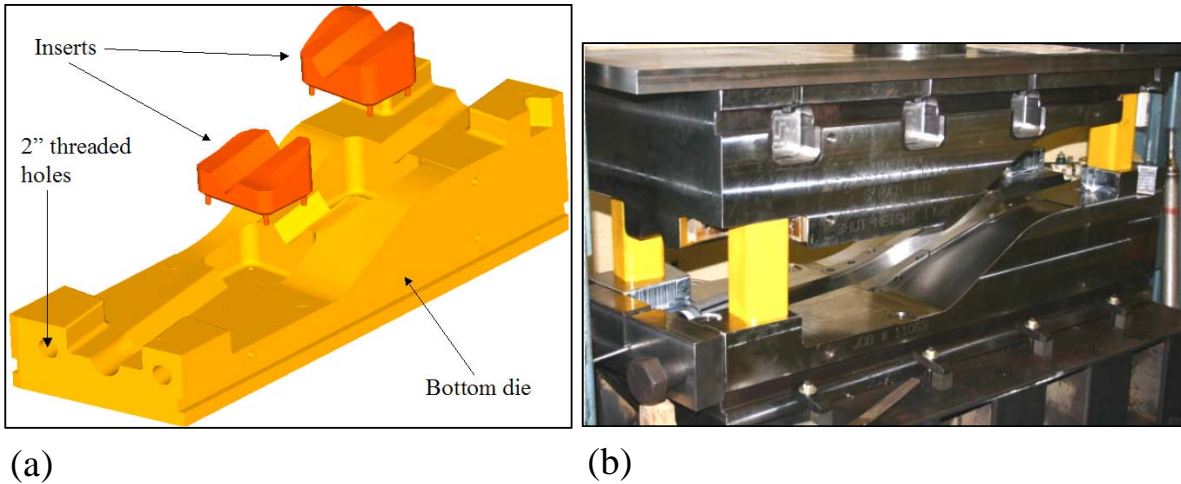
S-Rail hydroforming dies (a) Exploded drawing of the bottom die body with inserts (b) Upper and lower dies positioned in the press
